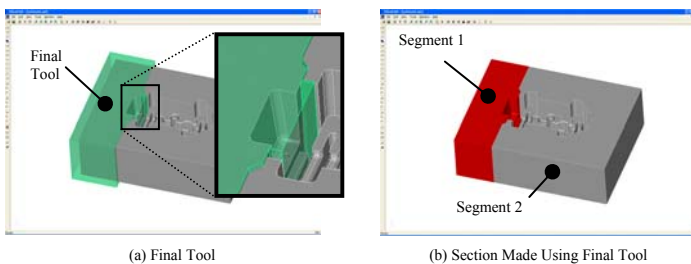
A Mold Before (a) and After (b) Segmentation
